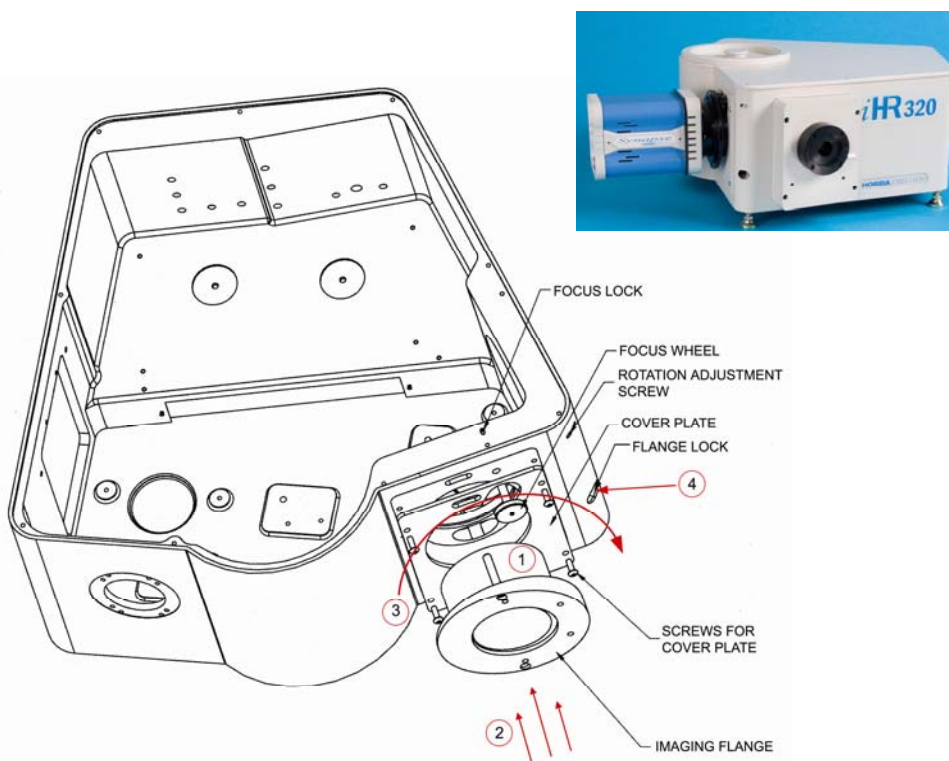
Flange Installation (Imaging flange pictured with iHR320 Spectrograph)
